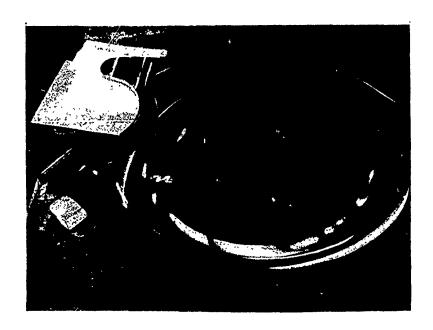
REINFORCING LUG PARTIALLY MACHINED
